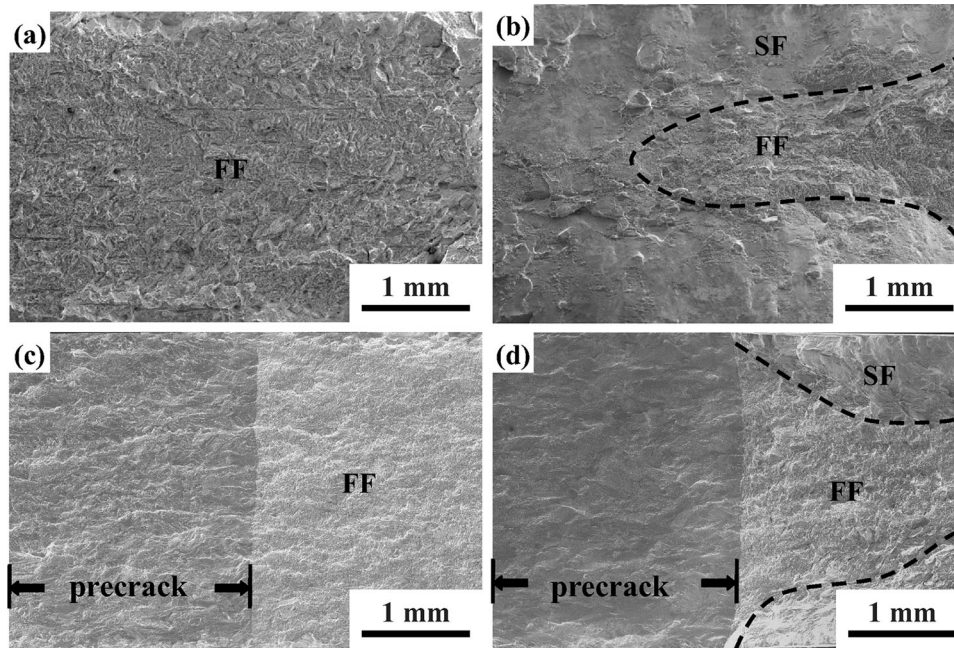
The macro-fracture appearance of the (a) D426 and (b) D593 specimens after notched tensile tests; (c) D426 and (d) D593 specimens after fracture toughness tests
